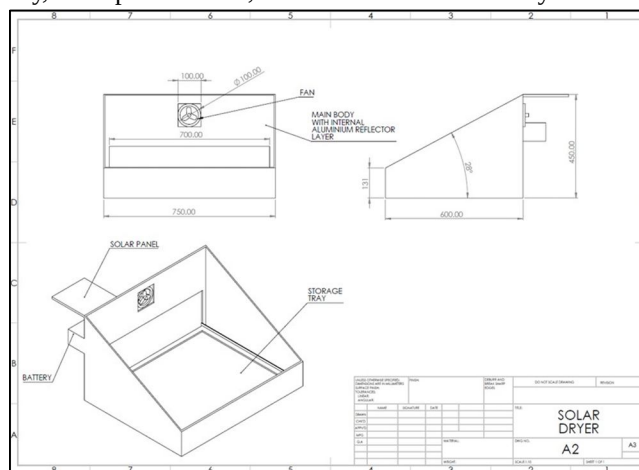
Engineering drawing of the solar dryer prototype showing base dimensions, side profile with 30° inclination, internal reflector, and positions of the fan, solar panel, and storage tray.
